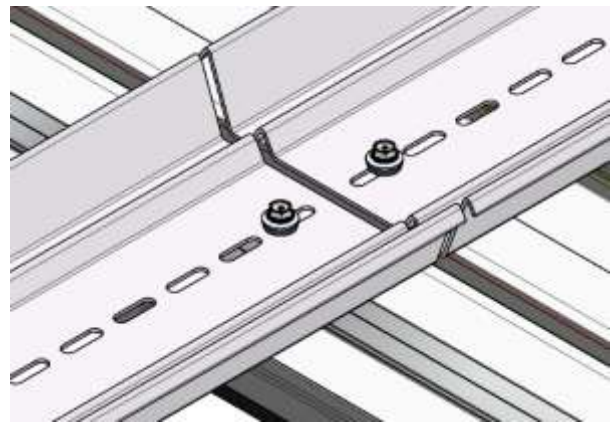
Assemble the ballast rail end to end, using a Self-Drilling-Screw 4.8x19
